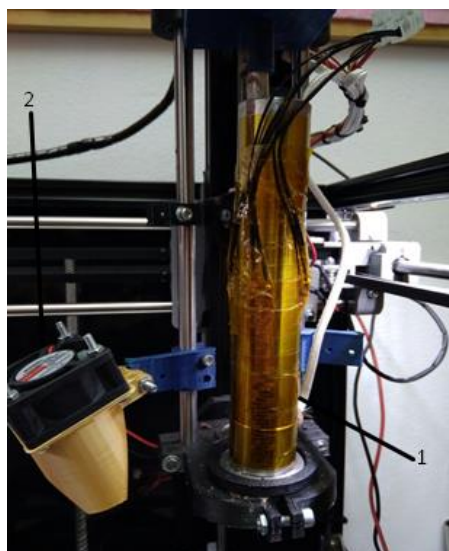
Stainless steel head : 1 - deposition head with transducer; 2 - cooler
